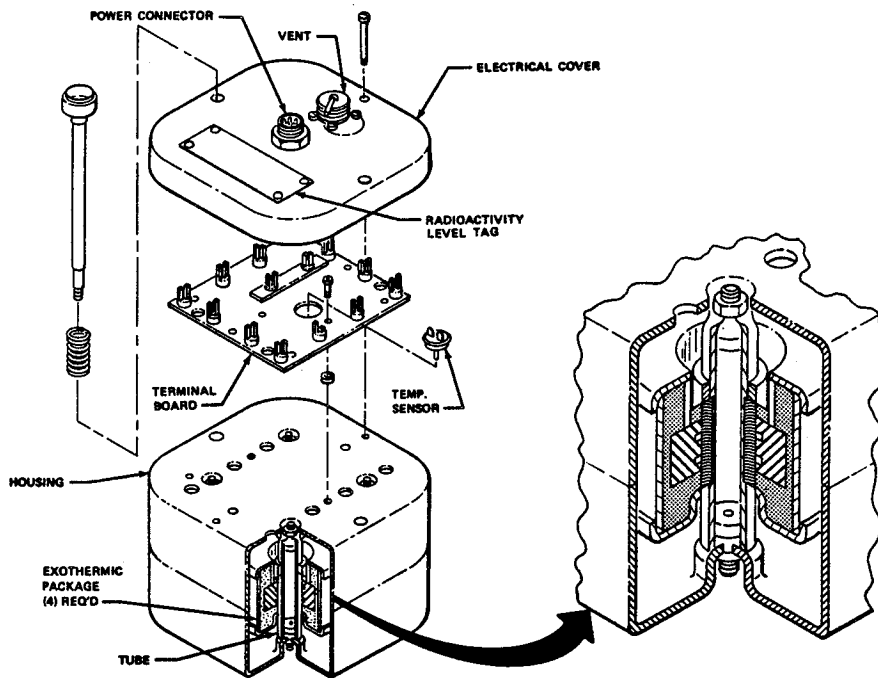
M552 EXOTHERMIC PACKAGE AT ASSEMBLY
